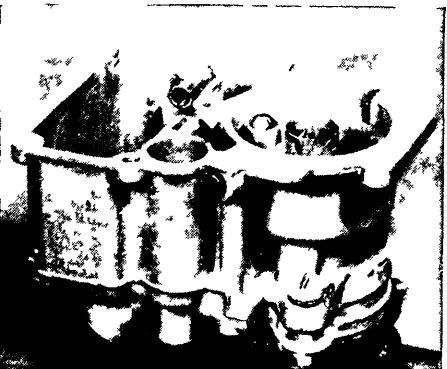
Assemble main body and spacer into throttle body, using new gaskets. Assemble main discharge jet (tool T-24967). Position jet so that its flat surface is parallel with direction of air flow
